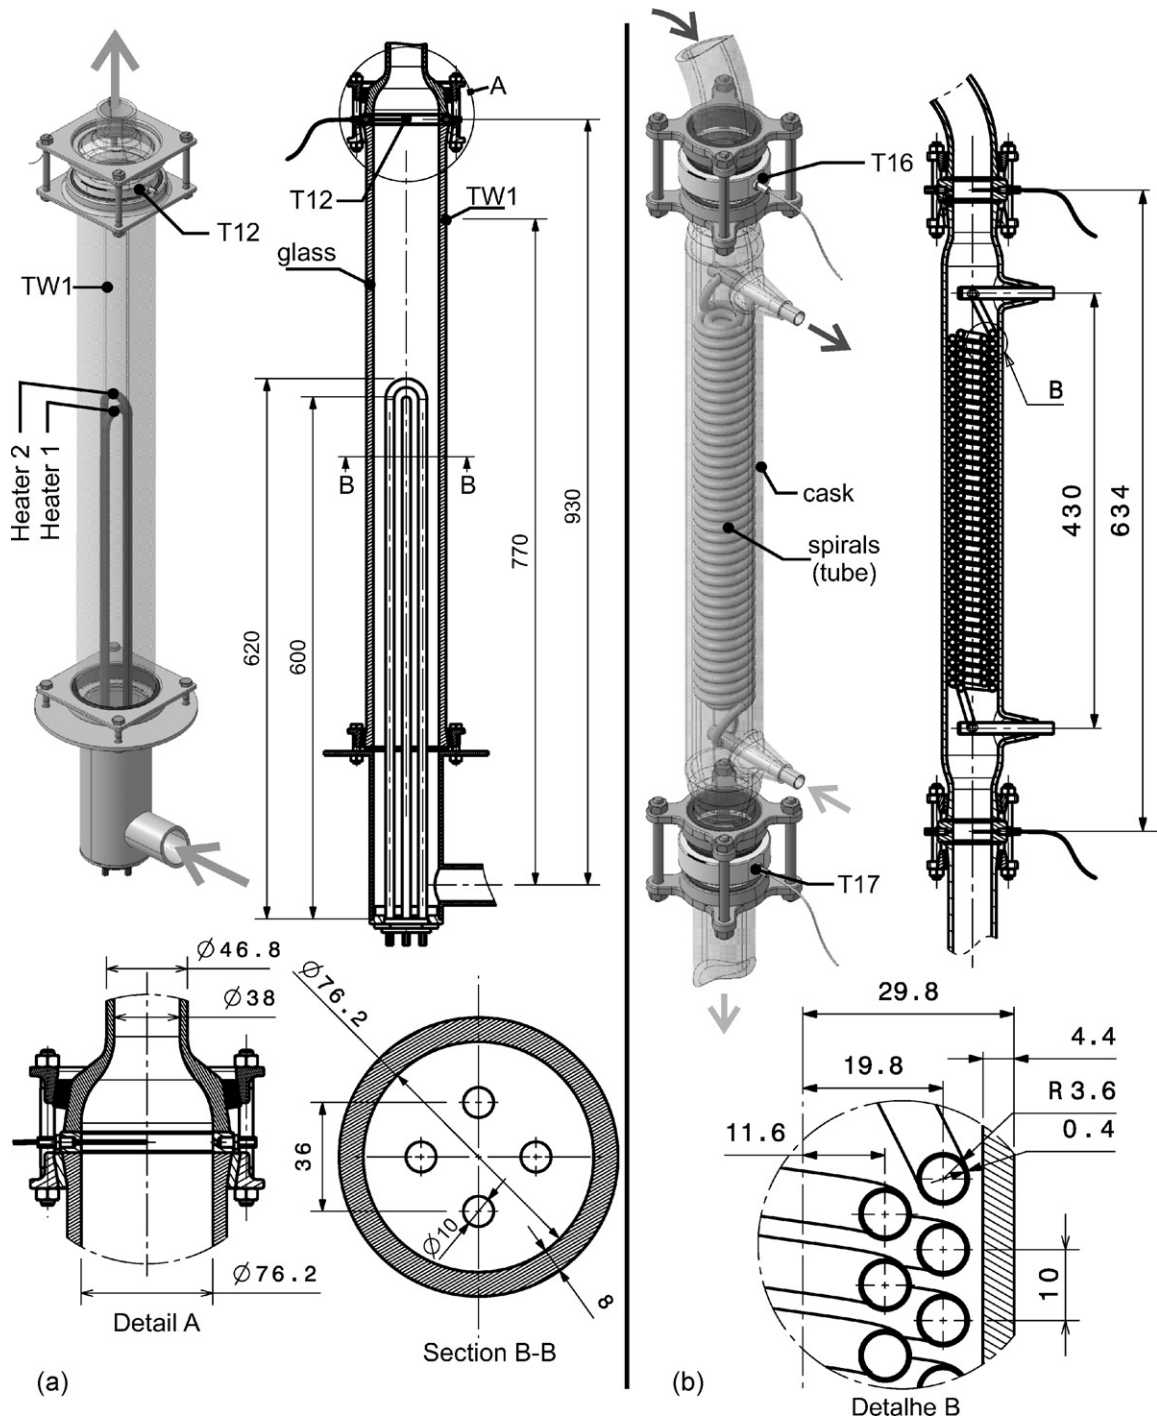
(a) Detail view of the heated section, (b) detail view of the heat exchanger, all dimensions in millimeters.
